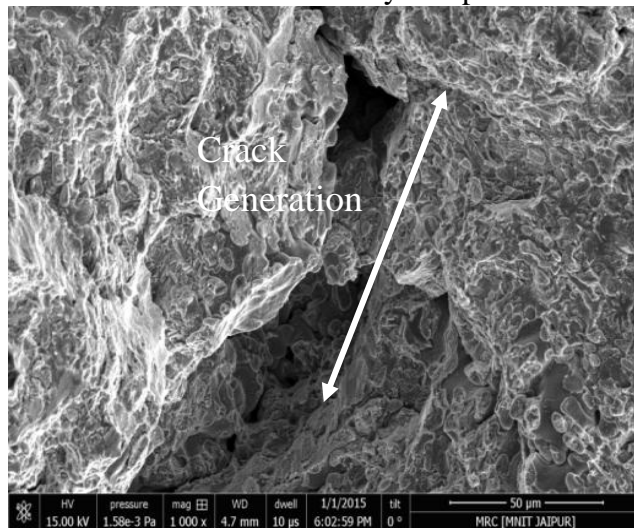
SEM fractographs for 10 wt.-% of MD particulate filled ZA-27 alloy composites after fracture test
